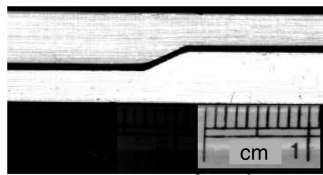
Aluminum mold for manufacturing the composite attachment.
